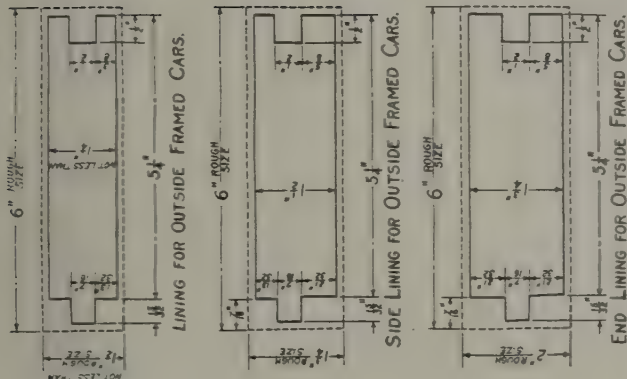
Recommended Practice for Lining for Outside Framed Cars. (M. C. B. Sheet 27.)
